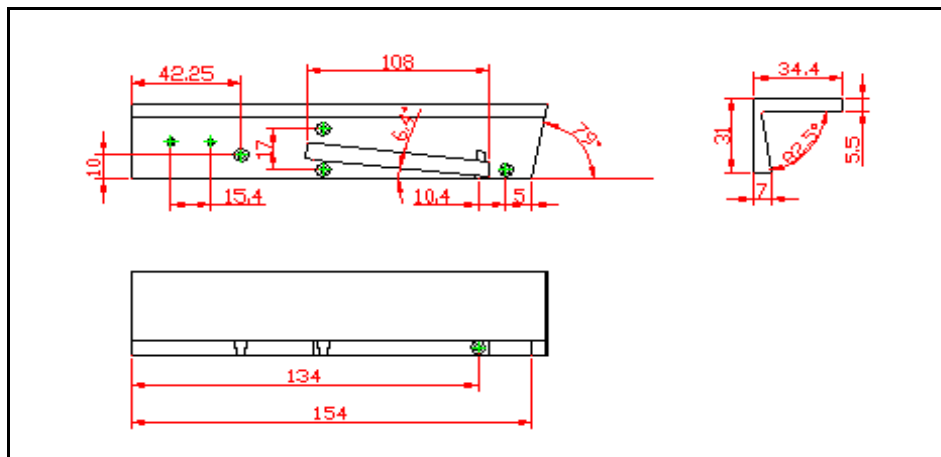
Dimensioned View of the Edge Riser Tool
